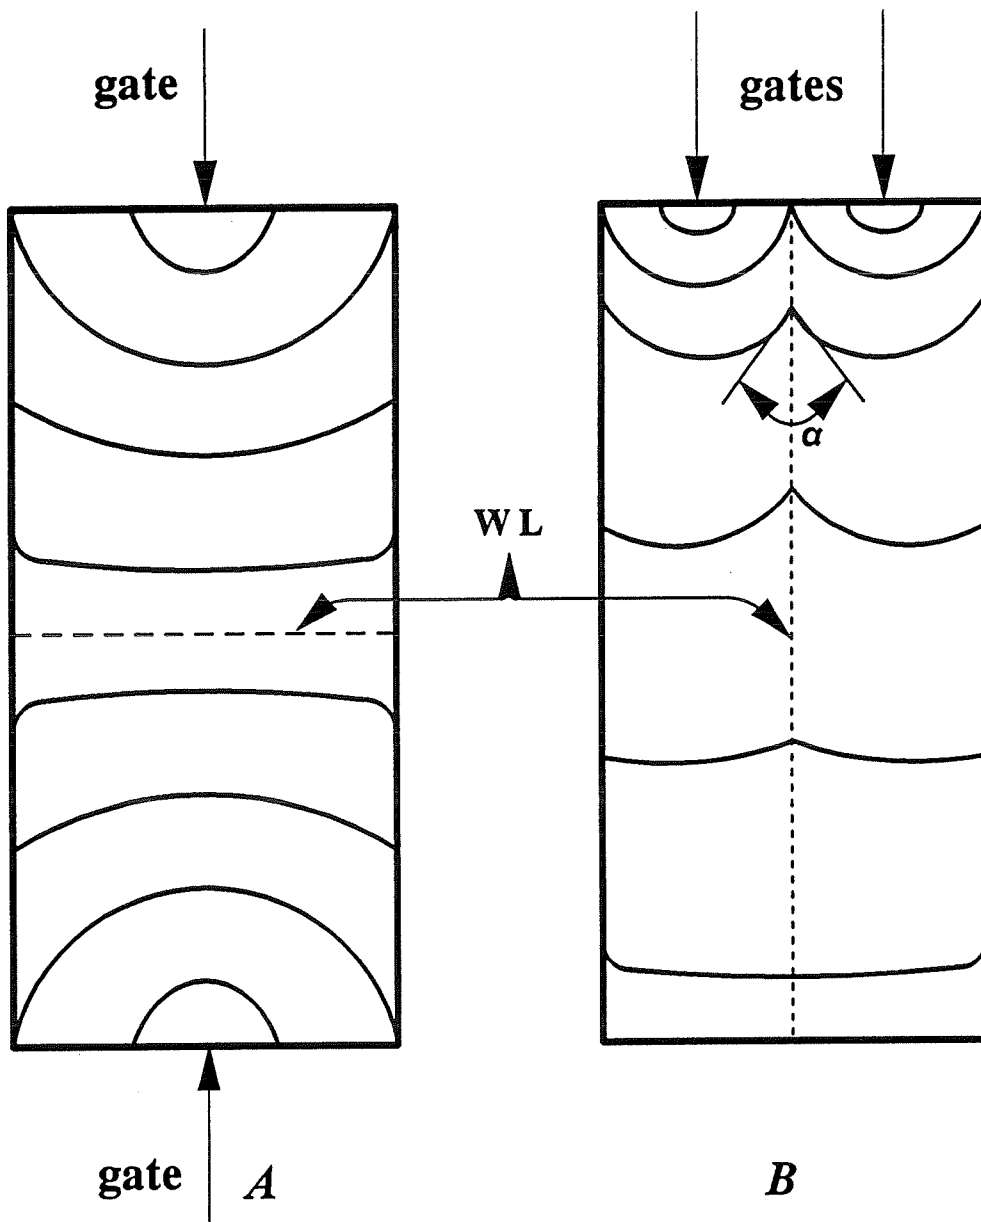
Two common causes of weldlines in injection molded parts (mold filling patterns in rectangular cavities). A- double gated mold, B- mold with two gates side by side. Weldlines are indicated by dashed lines, gates by arrows
